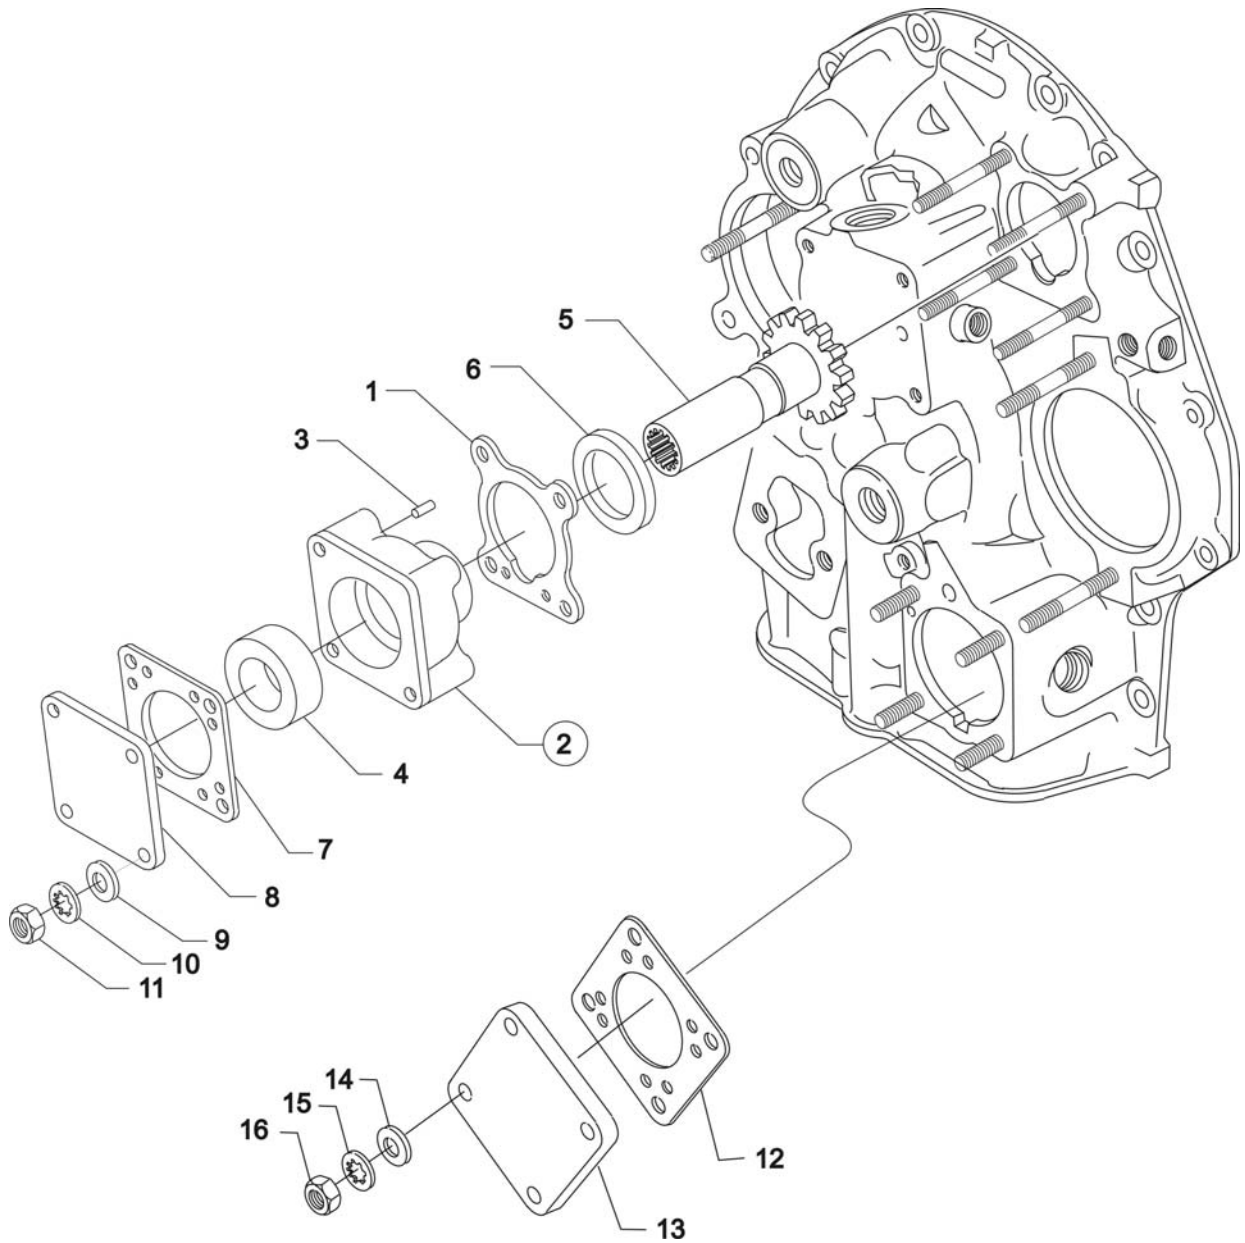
VACUUM AND HYDRAULIC PUMP DRIVES AND COVERS
